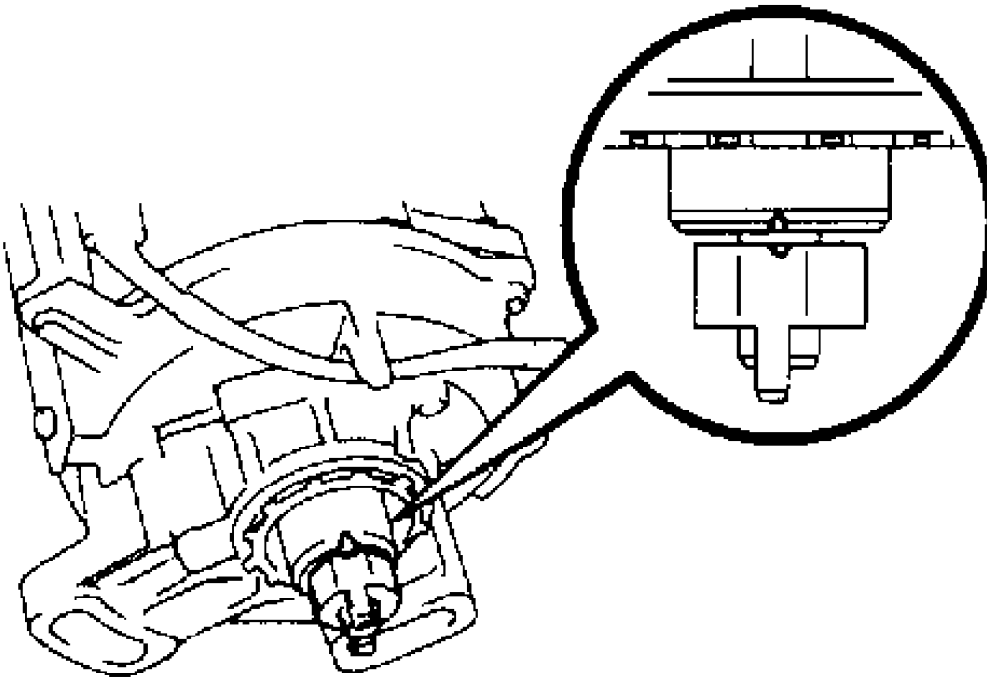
Aligning Distributor Cut-Out Marks (Similar)
